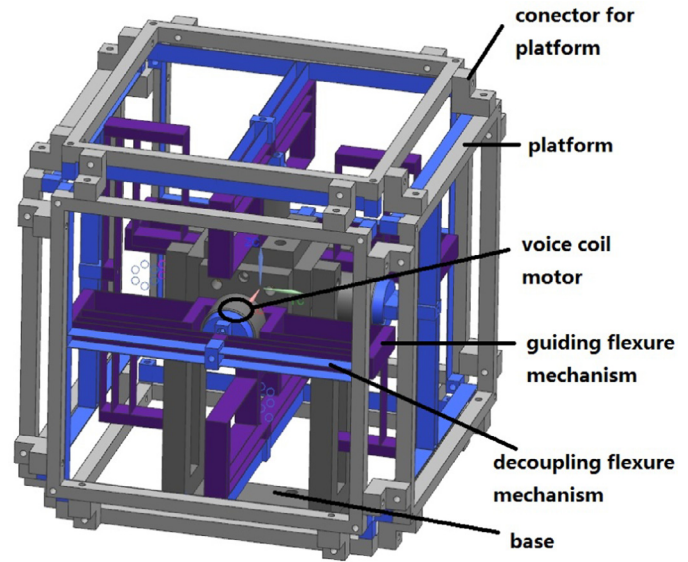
CAD model for the designed XYZ parallel flexure stage.
